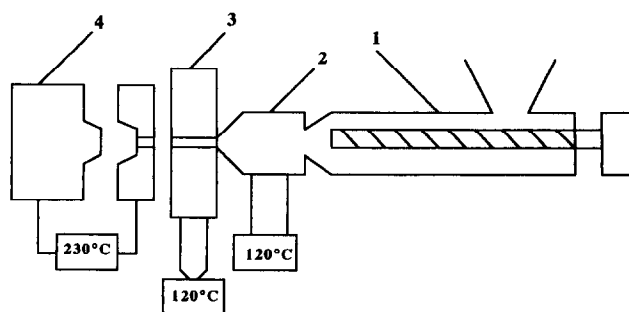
Set-up of modified injection moulding unit: 1, injection moulding unit; 2, nozzle; 3, thermal barrier; 4, injection moulding die.
